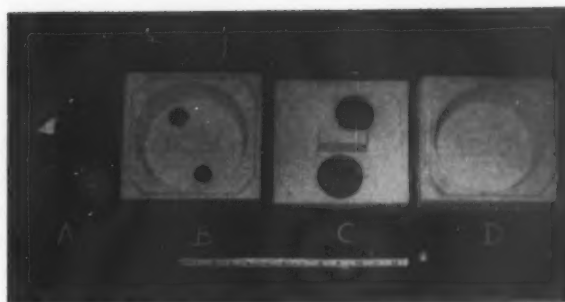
Refractory mold halves C and D were made from extrusion die A and plaster match B.
